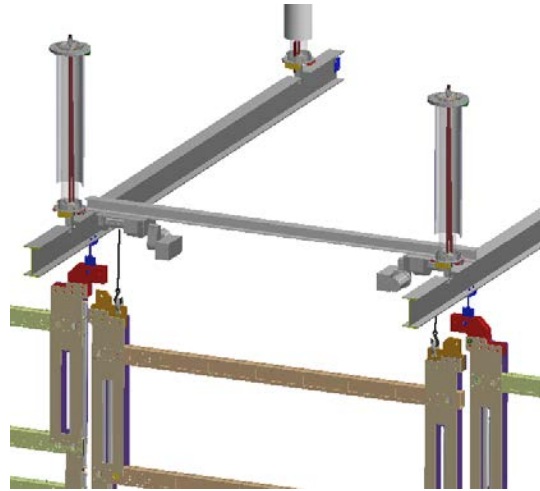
Image showing the hoisting equipment used to lift the endwall into position. The field shaping strips are removed in this image. This shows one of the 3.5 m endwall planes in place and a second being positioned.
